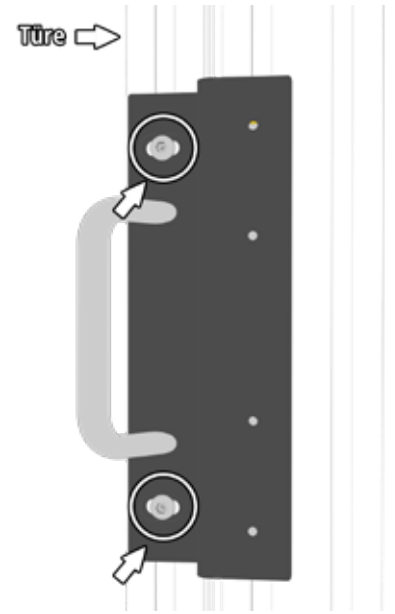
Attach the mounting plate with the anchor plate to the profile and align with the magnetic guard lock. Tighten the Torx screws M8 x 12 mm.
